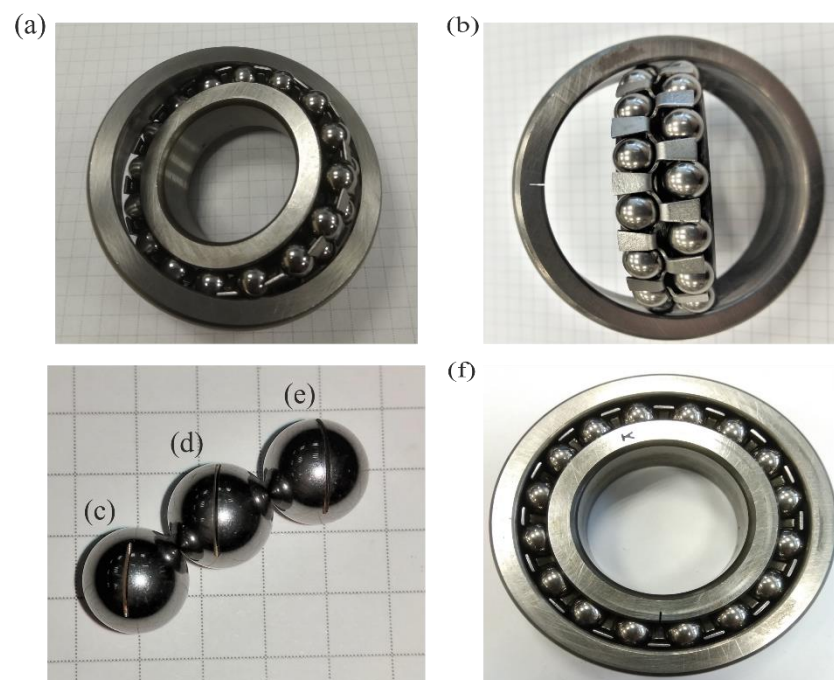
Ball bearing SKF 1207K: (a) undamaged; (b) with cut outer race; with the cut ball at the depth of: (c) 1 mm; (d) 2 mm; (e) 3 mm; (f) with cut inner race.
